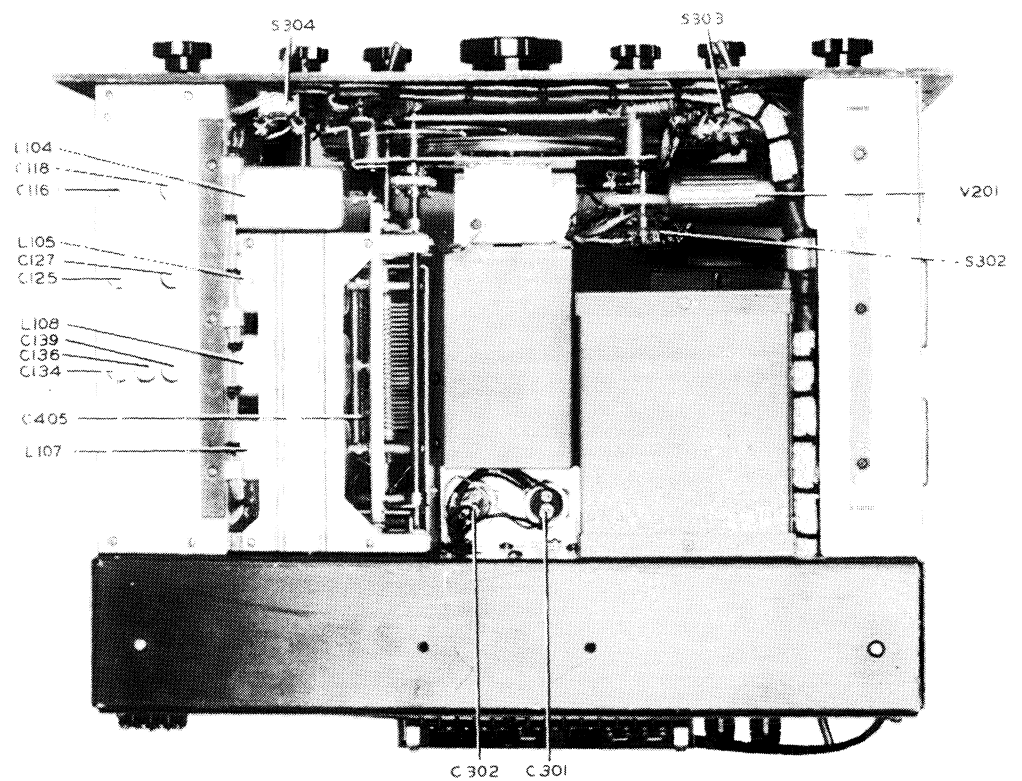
3 32V 2 PARTS ARRANGEMENT - BOTTOM VIEW
